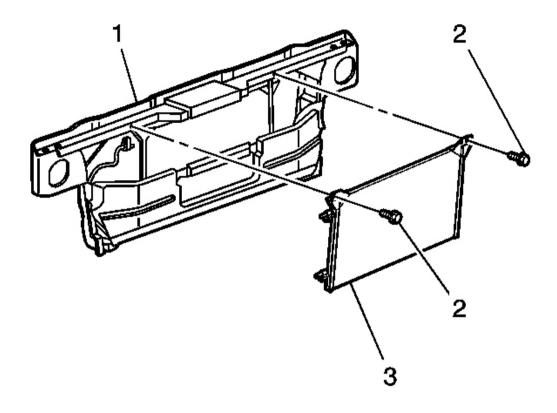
Condenser & Mounting Bolts Courtesy of GENERAL MOTORS CORP.
